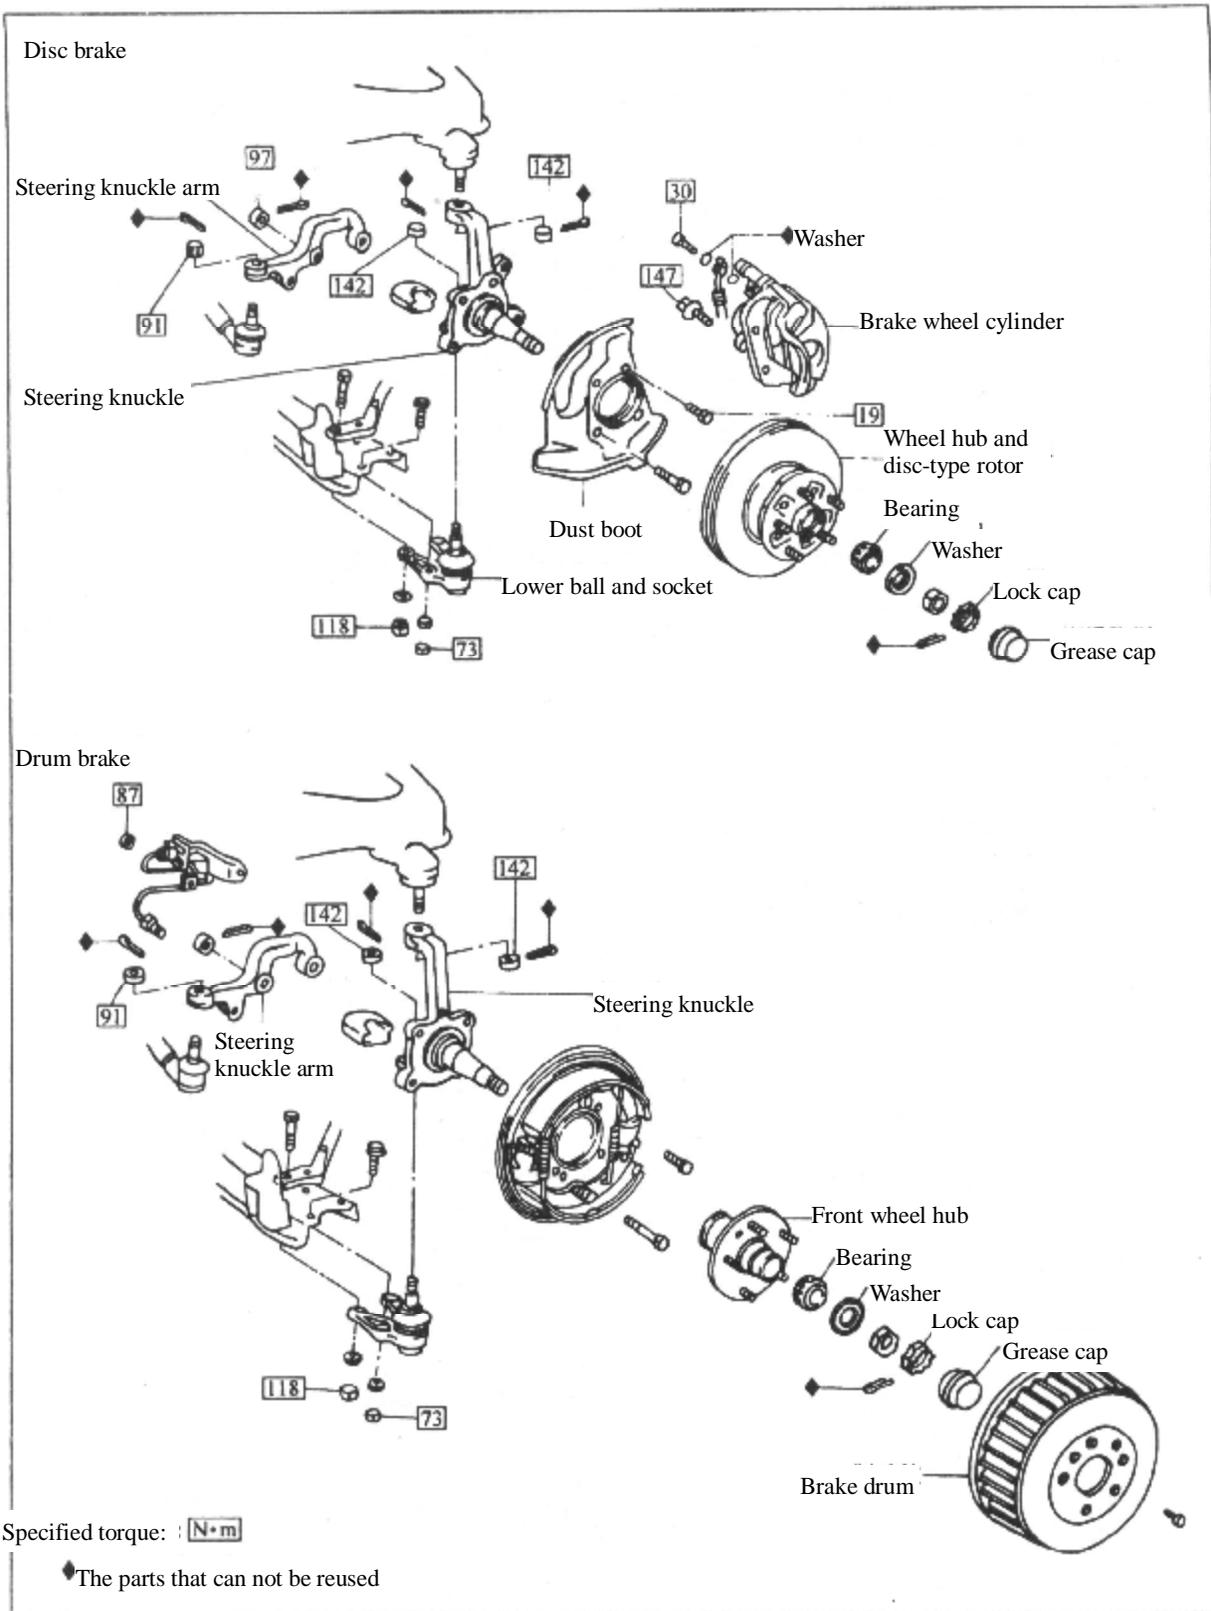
Decomposing View of Steering Knuckle Assembly
